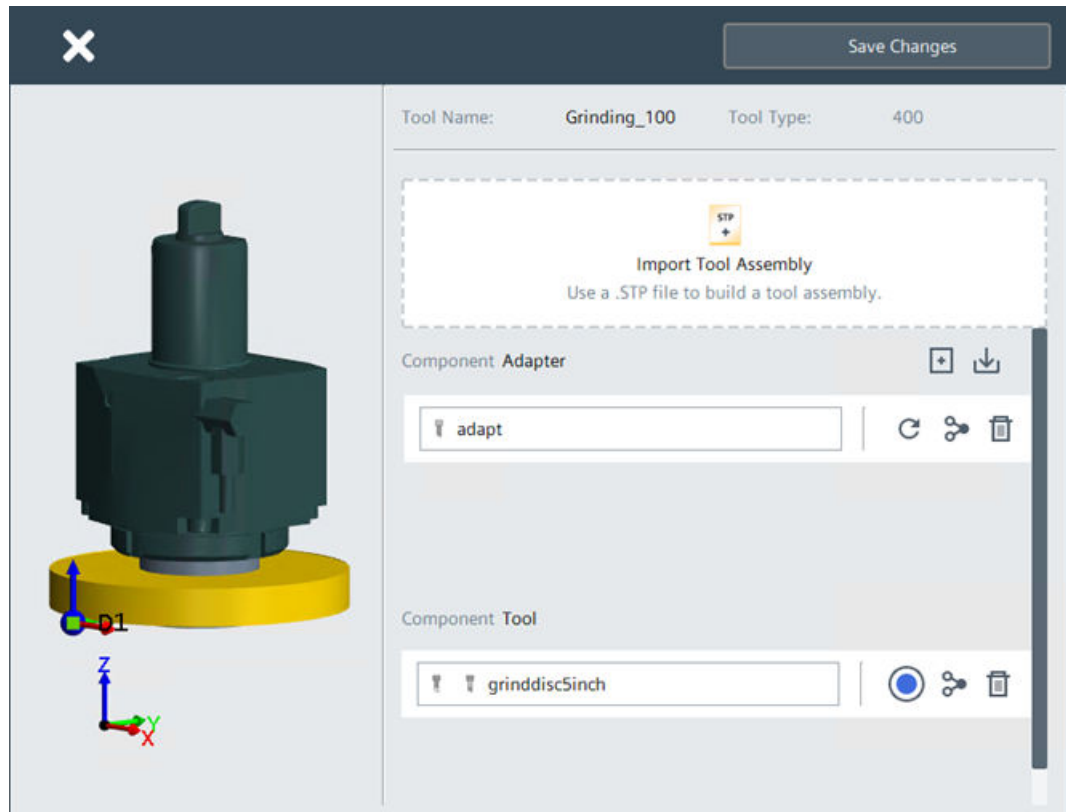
Grinding tool: adapter and tool with imported geometry data
